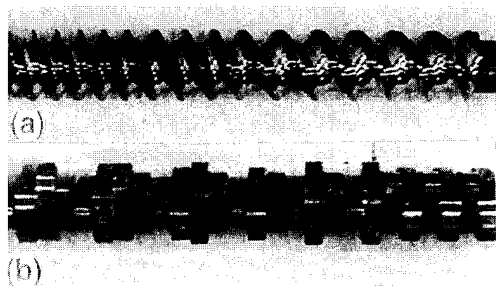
Examples of (a) regular and (b) kneading screw sections.
